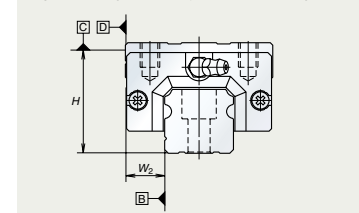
Drawing for accuracy standard (mounting with *W<sub>3</sub>*)
